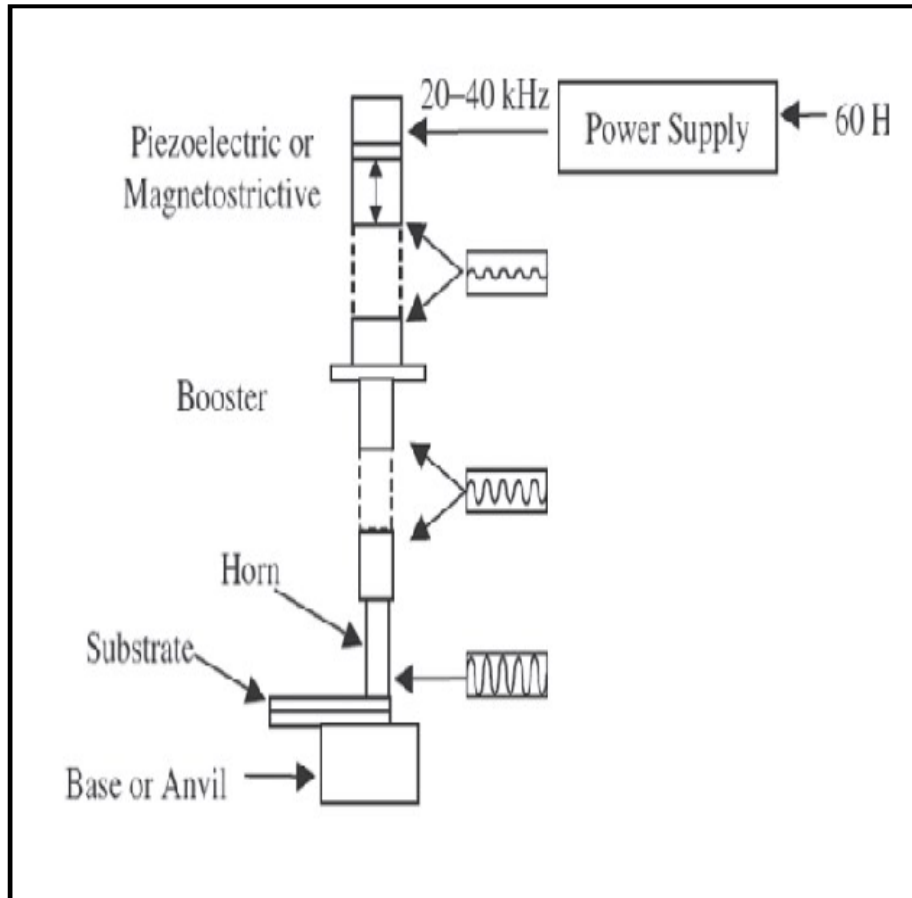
Arrangement of an ultrasonic welding device
